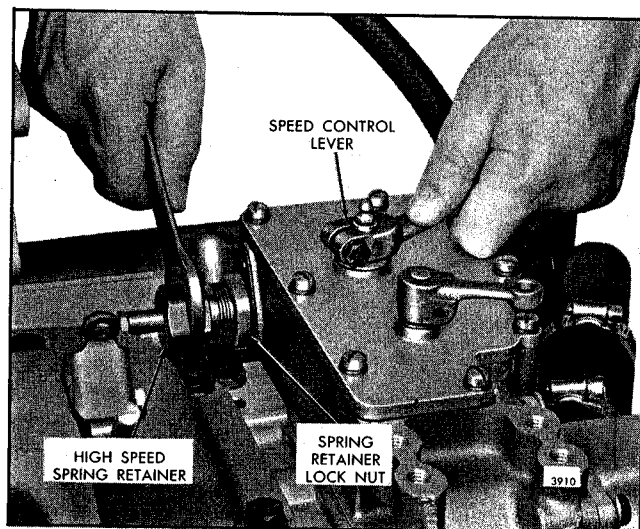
Adjusting Maximum No-Load Engine Speed
